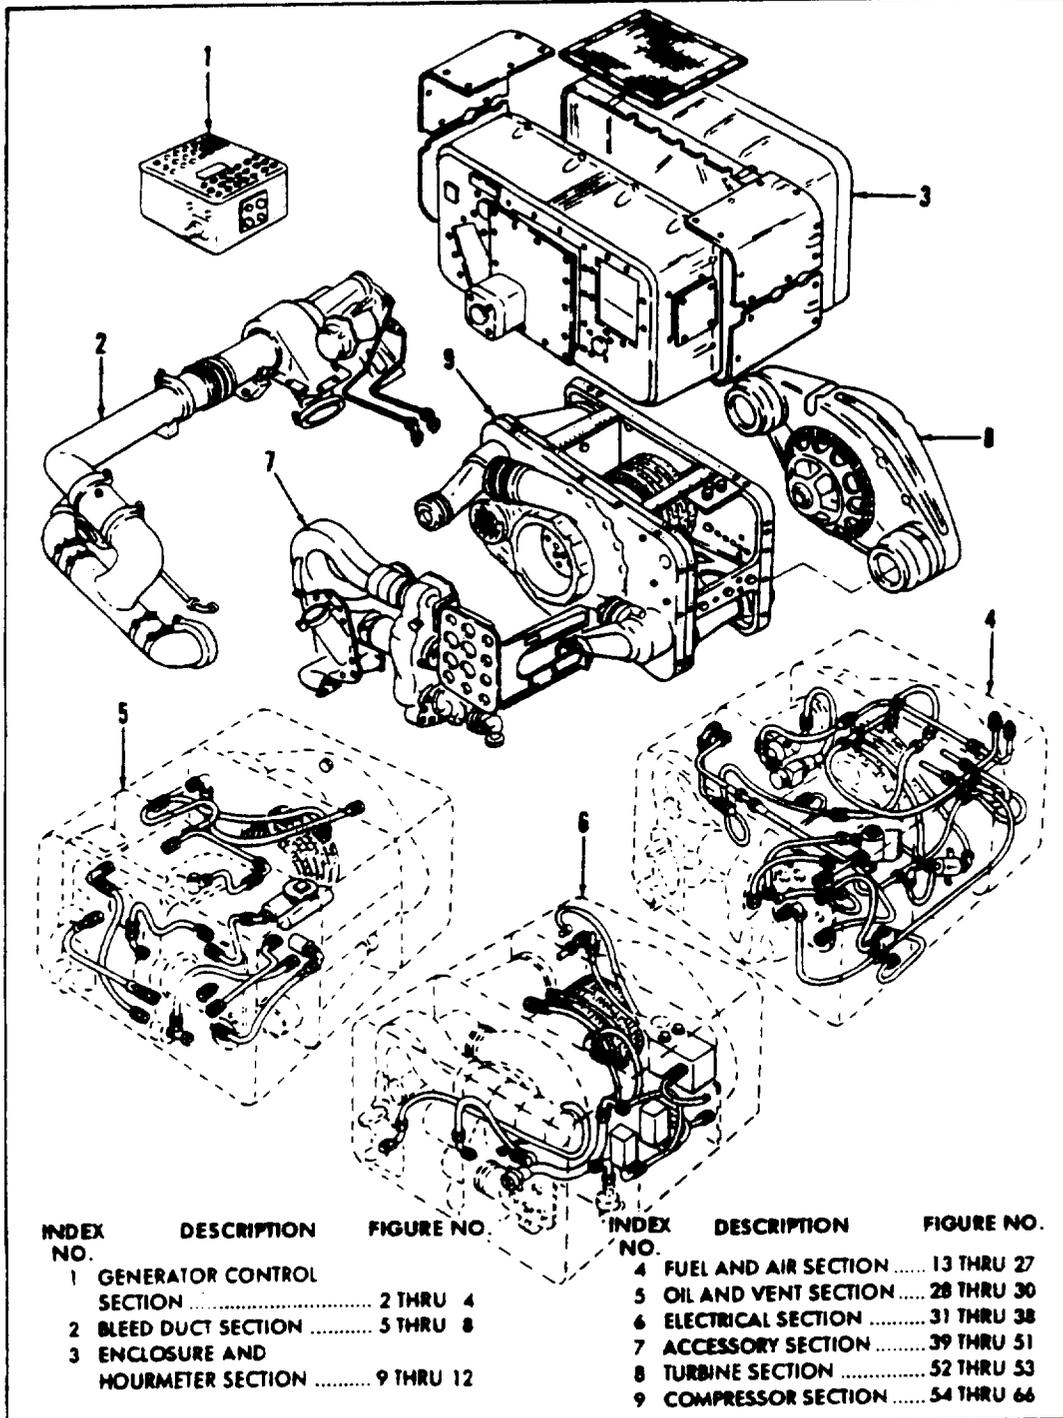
Exploded View of Complete Enclosed Gas Turbine Compressor
